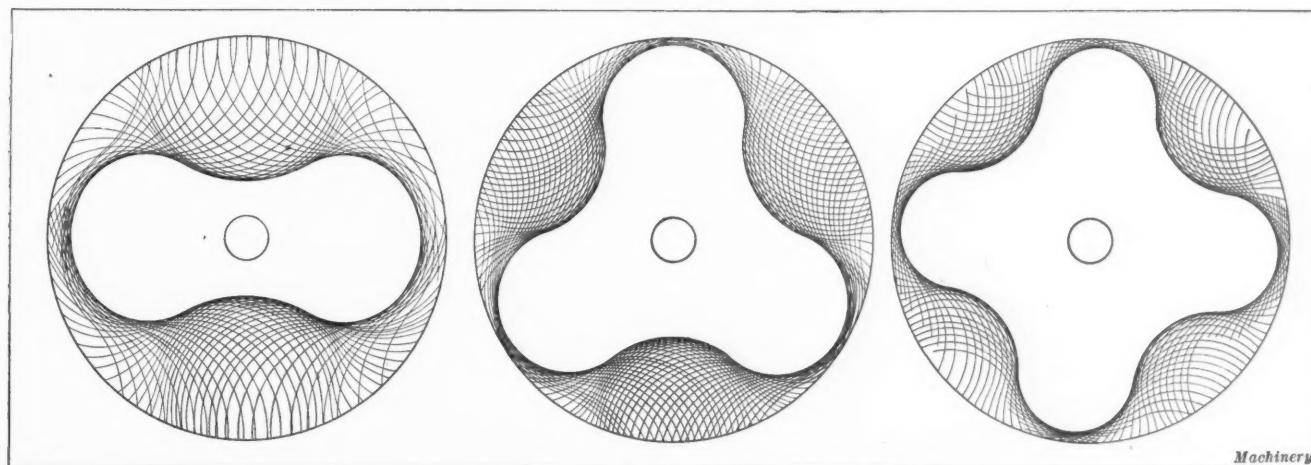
Master Form for developing a Three-tooth Impeller of 4 inches Pitch Diameter
